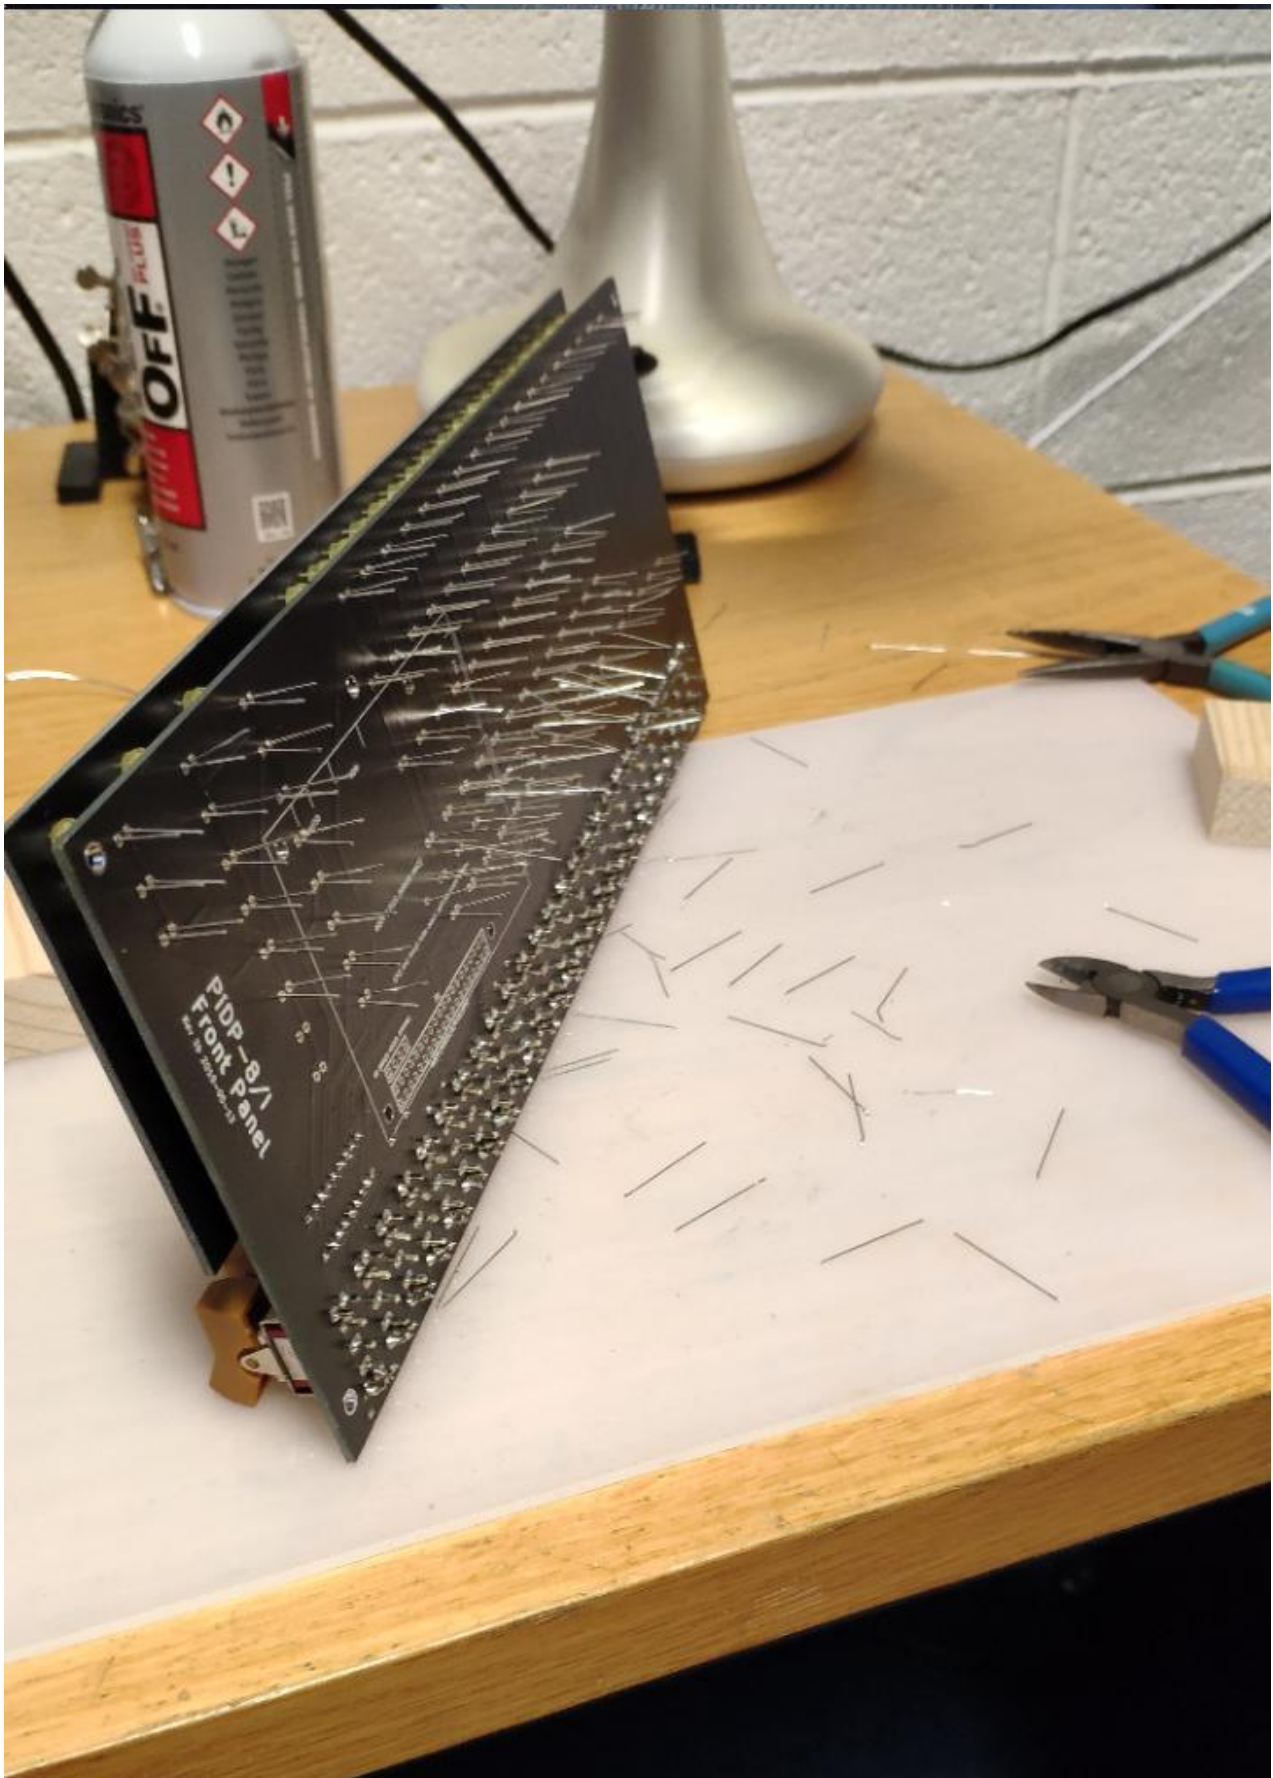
PiDP-8/1 rear three-quarter view during assembly
